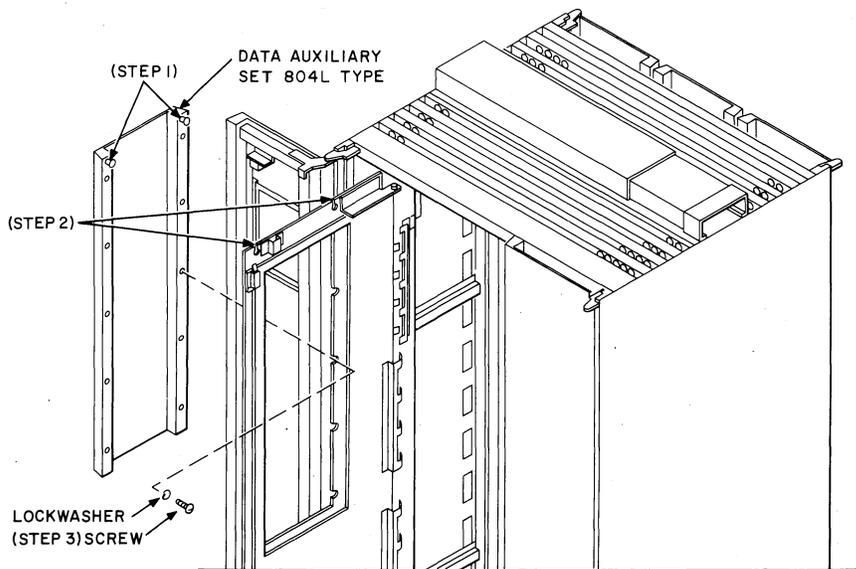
Typical Multiple Data Set Installation, Equipment Arrangement
